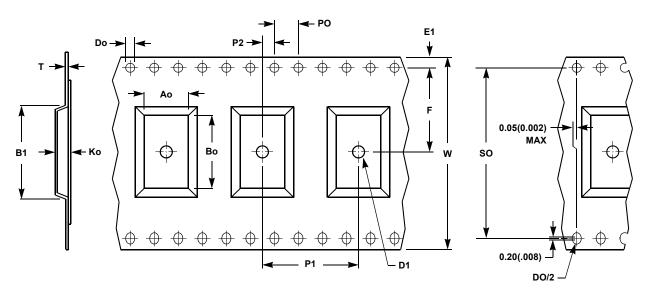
CONFIGURATION DRAWING FOR 32MM AND 44MM POCKET TAPE
